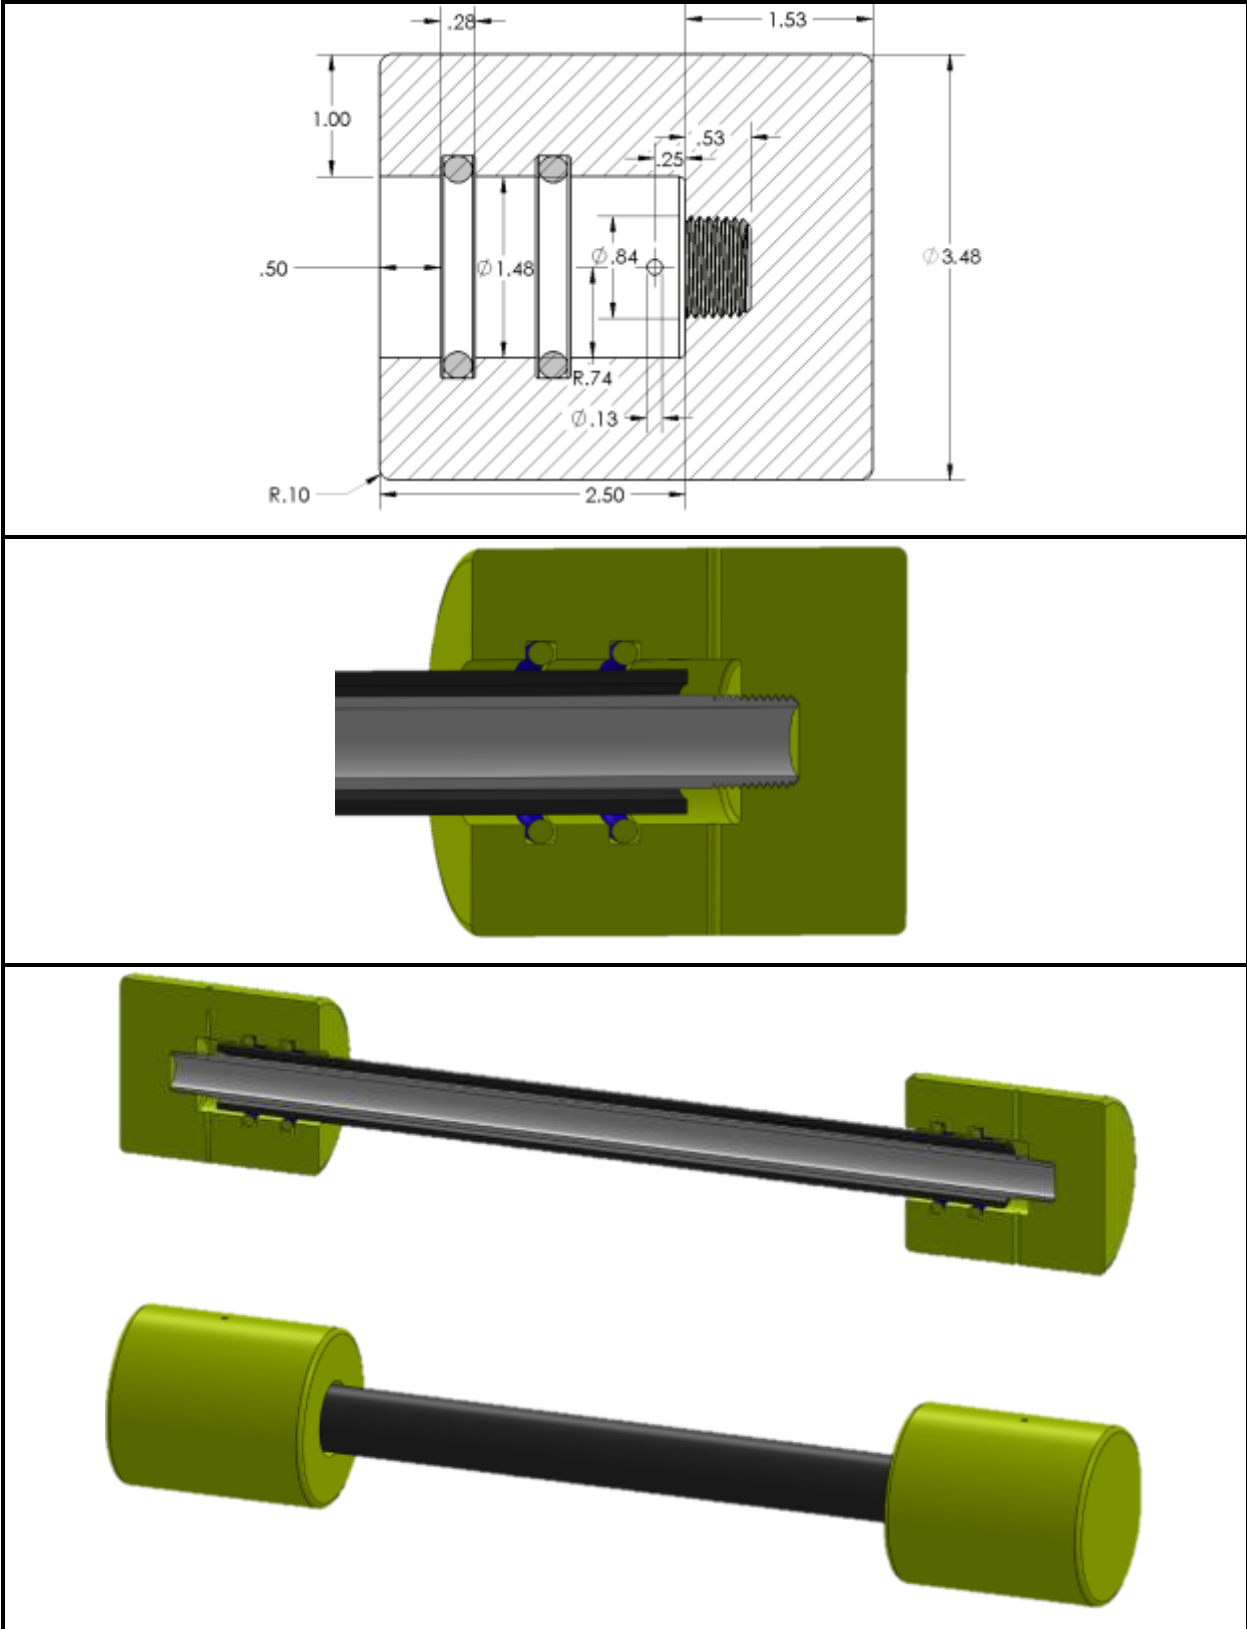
Burst test fixture when the end caps are attached with a metal rod (the dimensions are based on inches)
